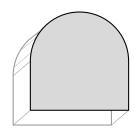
Extruded arched panel SOLID1_3 in isometric view. Extrusion is taken from profile dimensions
